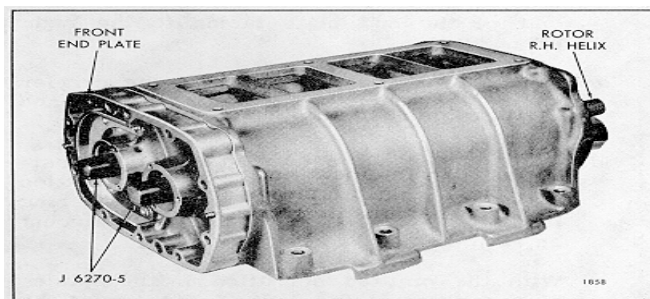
Assembling Blower Rotors into Housing and Front End Plate (Lip Type Oil Seals)
